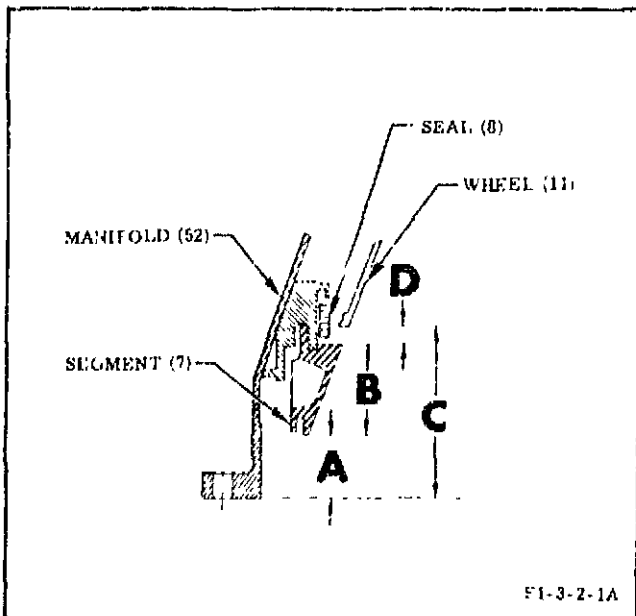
A-7. Determining First-Stage Wheel-to-Segment Clearance
